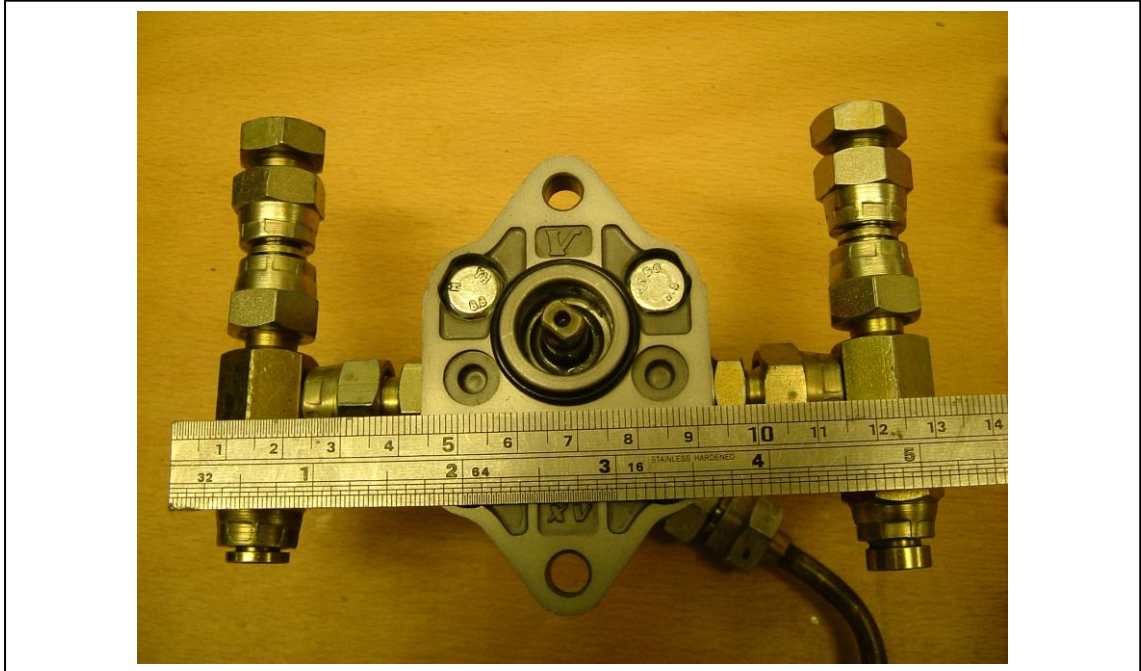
Hydraulic gear pump with shaft seal removed.
